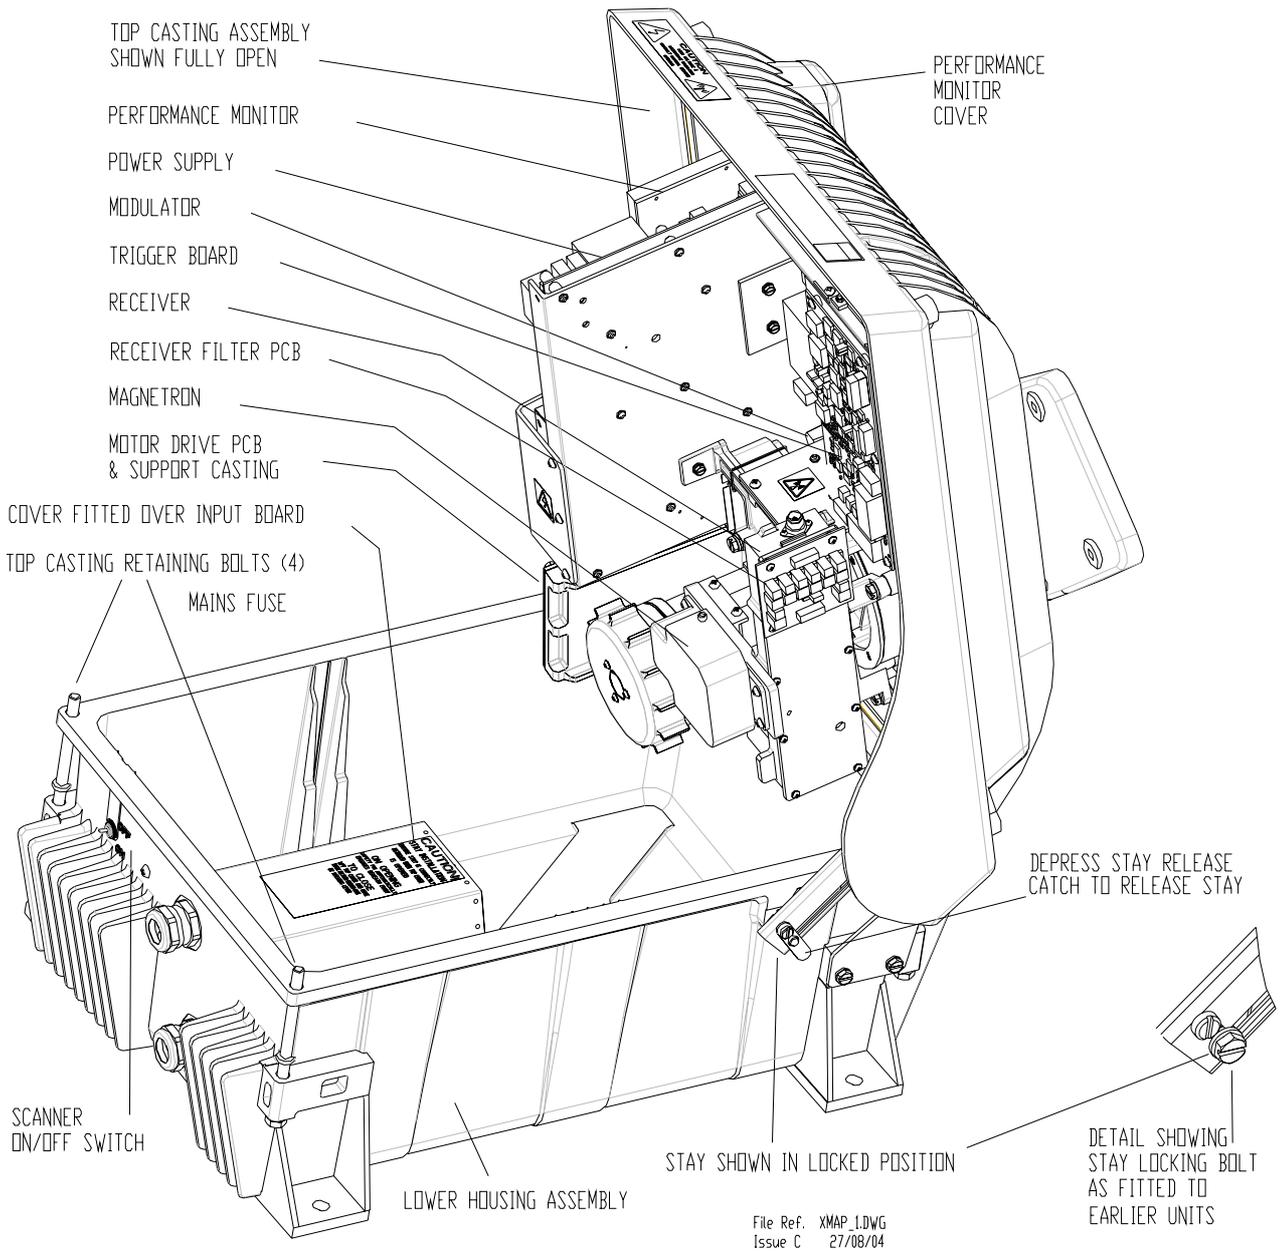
X-Band Masthead Turning Unit – Internal view showing Transceiver
